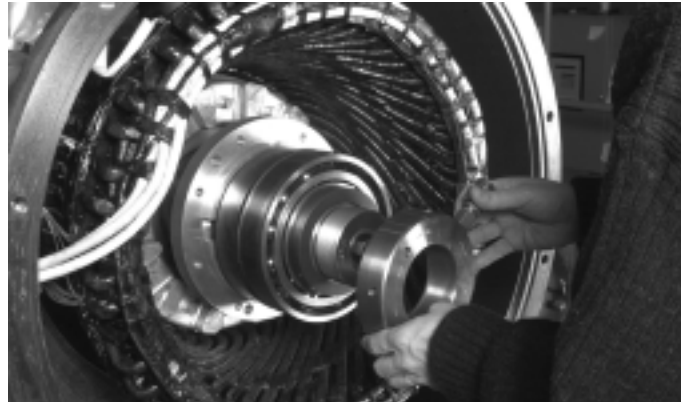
Hand tighten the hydraulic assembly nut using the rod provided with the nut.
